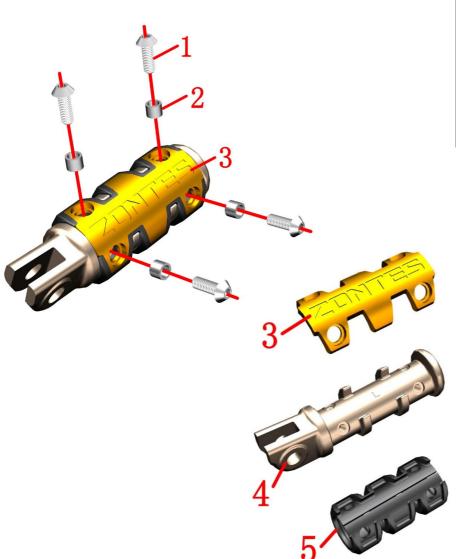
FO	OOT PEDAL	Front left pedal after sale parts	CHK	(0)
